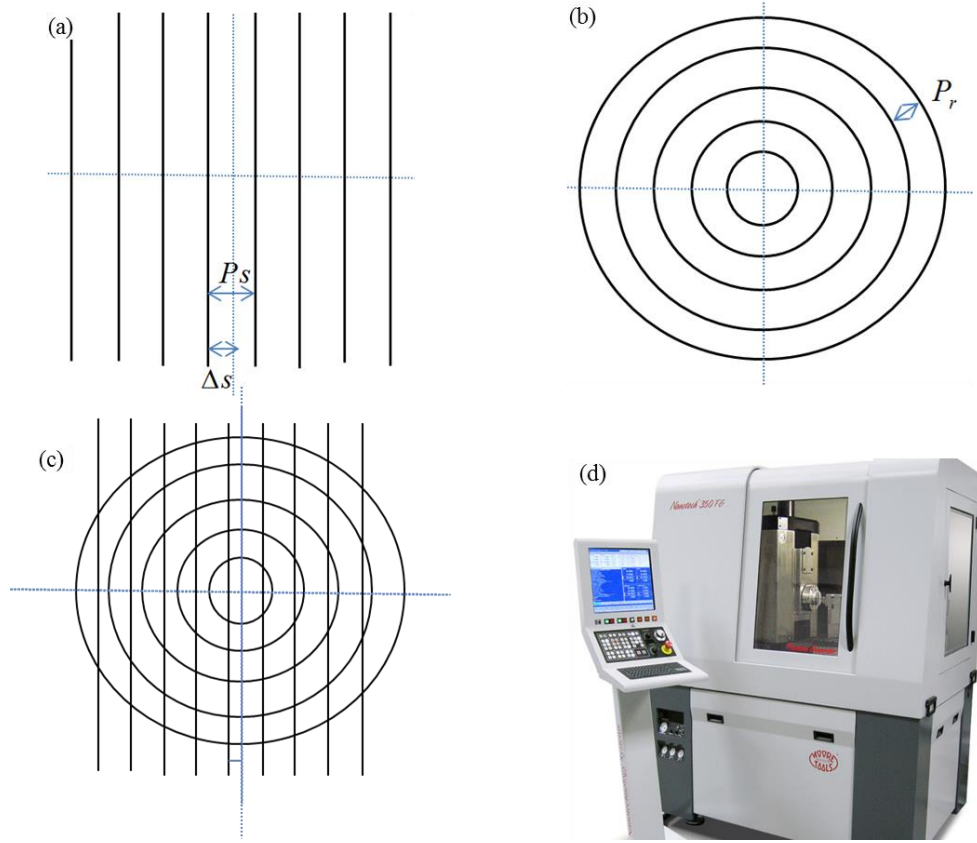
Machining steps with reference to the design principles. a) The first machining process which broaches straight grooves. b) The second machining process is turning round grooves. c) Formative mixed surface texture after the above machining process chain. d) Machining equipment: Nanoform 350G from Nanotechnology Inc., USA.
